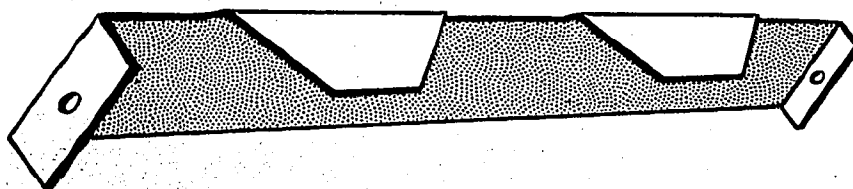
Support after cut out showing right angle bends in platforms and ends.
